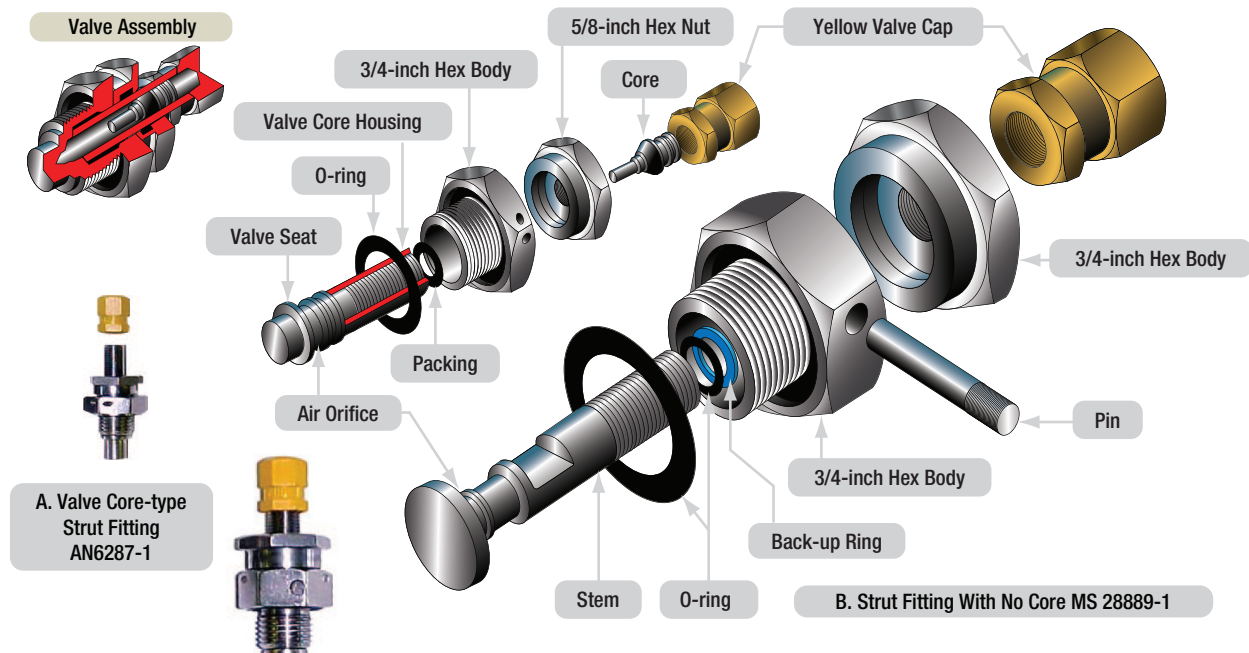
Valve core-type (A) and core-free valve fittings (B) are used to service landing gear shock struts.
